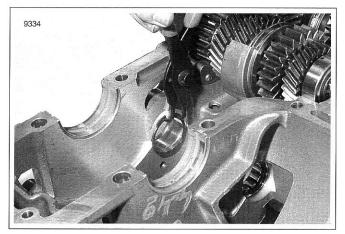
Outboard Bearing Inner Retaining Ring Installation
